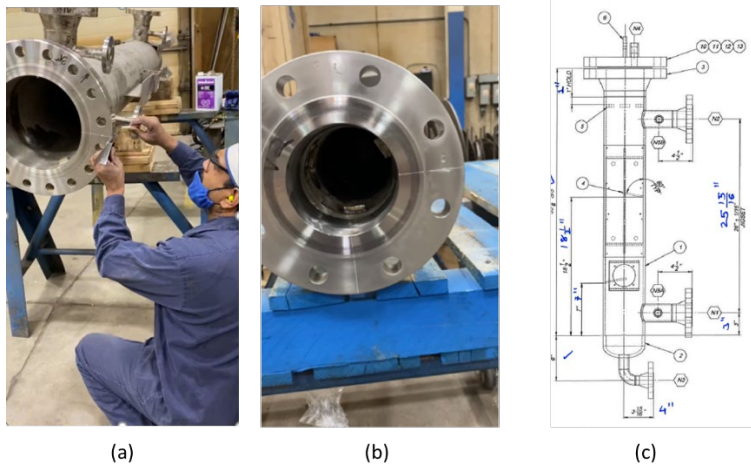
The use of termination points as part of the fabrication process. (a) A fabrication worker using manual measurement tools to detect the centerline on a flange. (b) the centerline marked on the flange using chalk. (c) the required QC measurements using termination points
